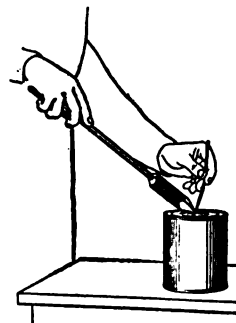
Closing the vent hole in a can of vegetables with solder and soldering iron.
